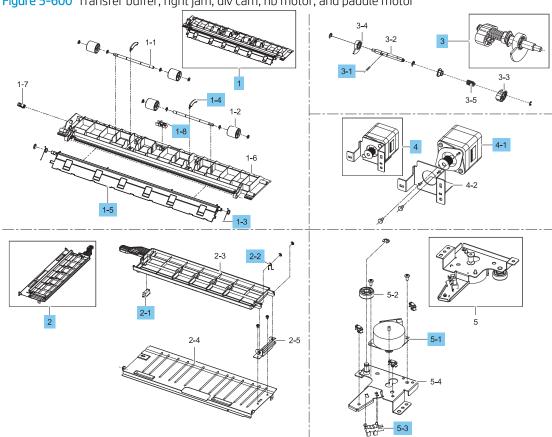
Transfer buffer, right jam, div cam, hb motor, and paddle motor
